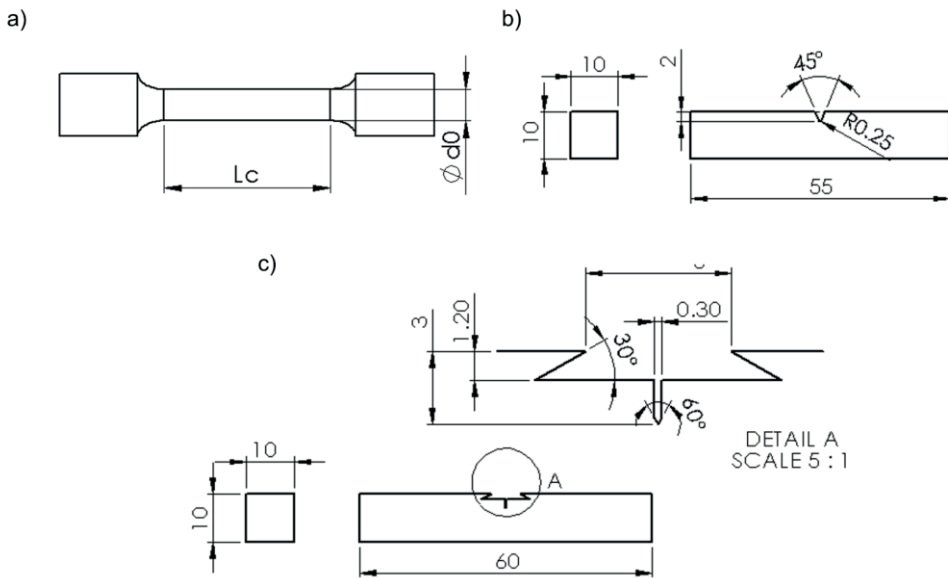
Sample dimensions (mm) of a) tensile tests, b) Charpy-V impact tests, and c) fracture toughness tests.
